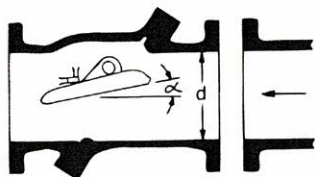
Tilting disc check valves. (courtesy of Crane Valve Co.)
